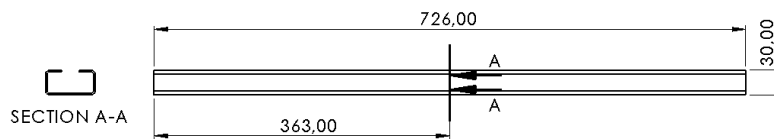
Side view of the sheet metal strip and location of the analysed cross section, section A-A (dimensions in mm).
